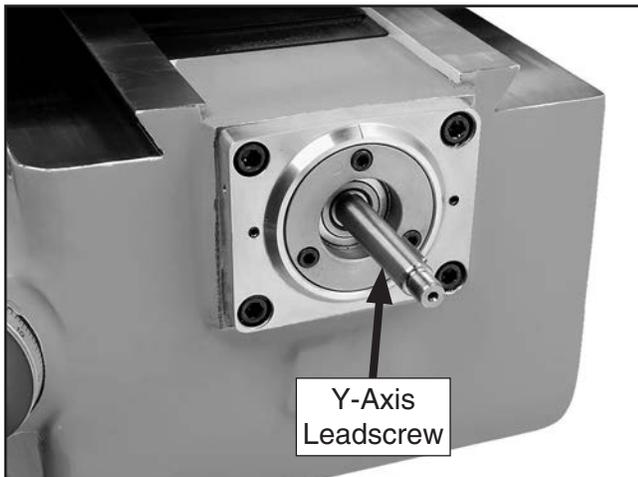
Ball handle, ring, and key removed from Y-axis leadscrew.
